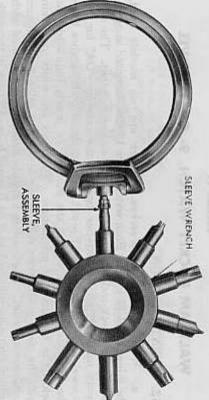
Removing Stem and Sleeve With Sleeve Wrench
